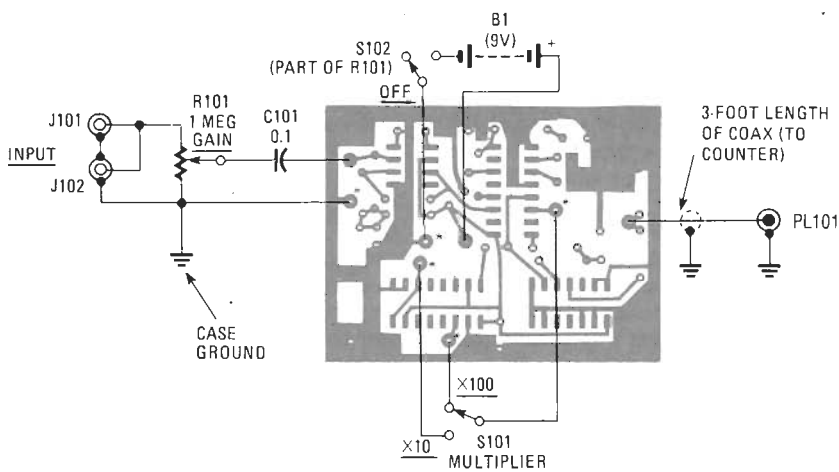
CONNECTIONS TO CASE-MOUNTED parts. Shield of coax used for output is tack-soldered to ground foil on bottom of board.
